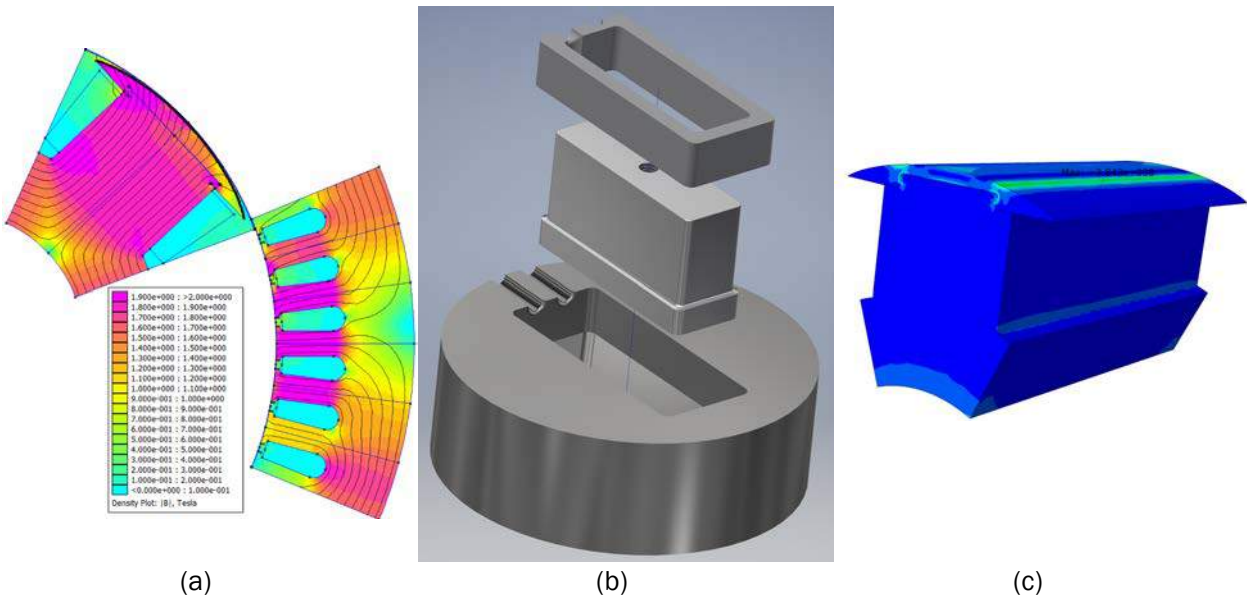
Proof of concept wound field synchronous machine rotor with die compressed field winding and magnetic joint including (a) magnetic simulation of down selected design, (b) die design, and (c) dovetail stress analysis at 12,000 RPM.
